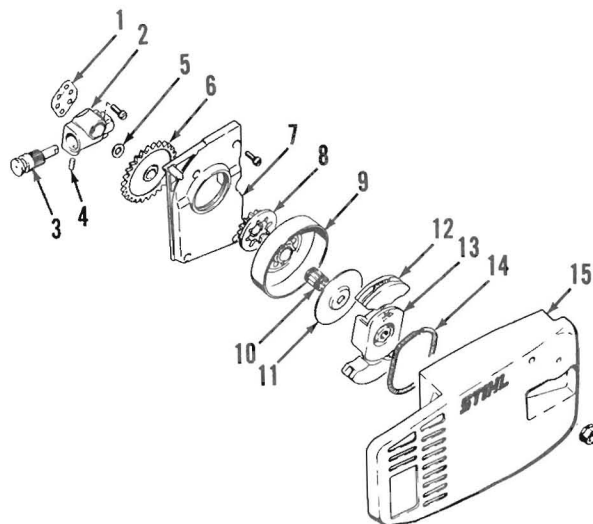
Exploded view of clutch assembly and chain oiler pump.
